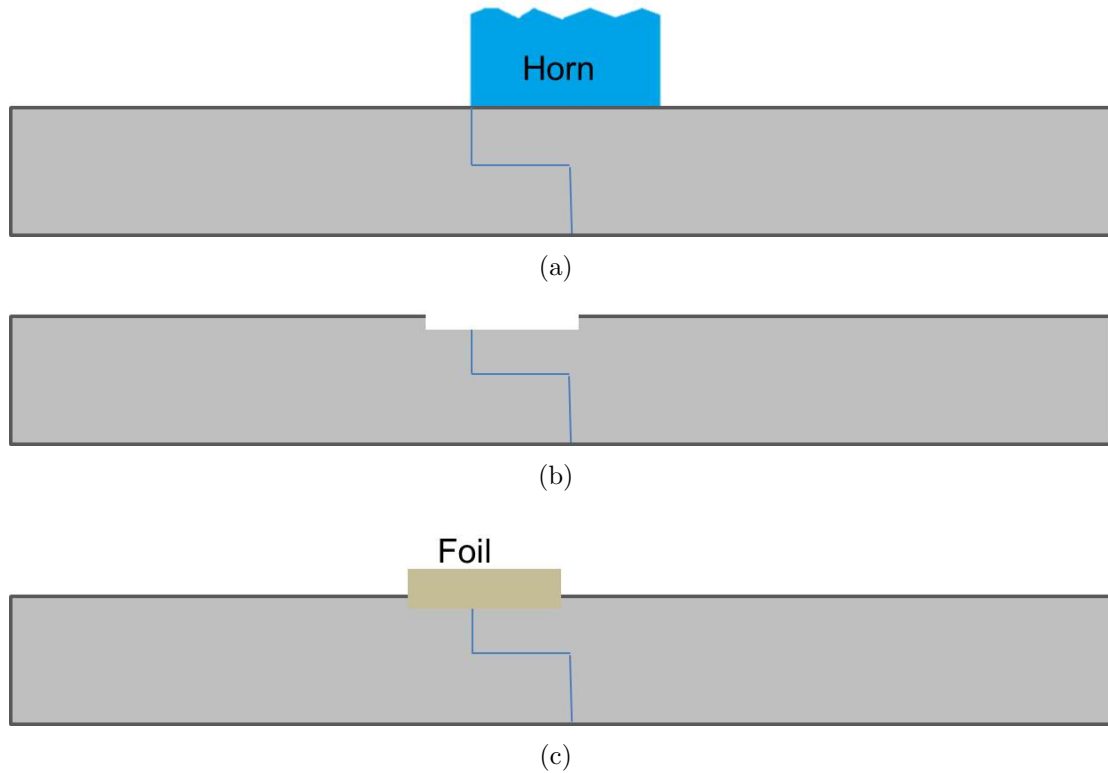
(a) Layout for lap joint (b) joint with machined surface and (c) joint with flush surface using foil.
